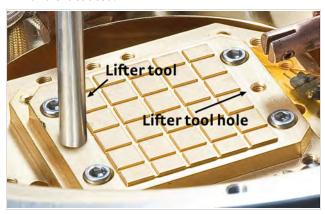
Lifter tool screwed into a lifter tool hole
